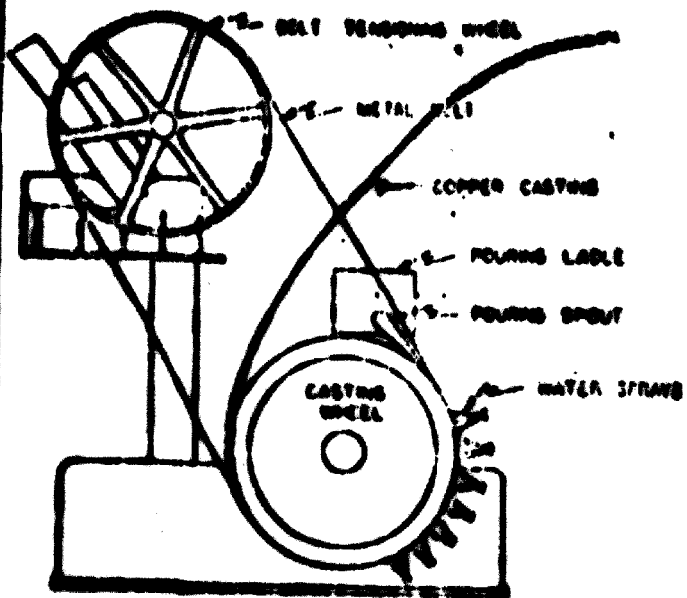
Schematic showing the basic details and principle of the Paper casting machine.
